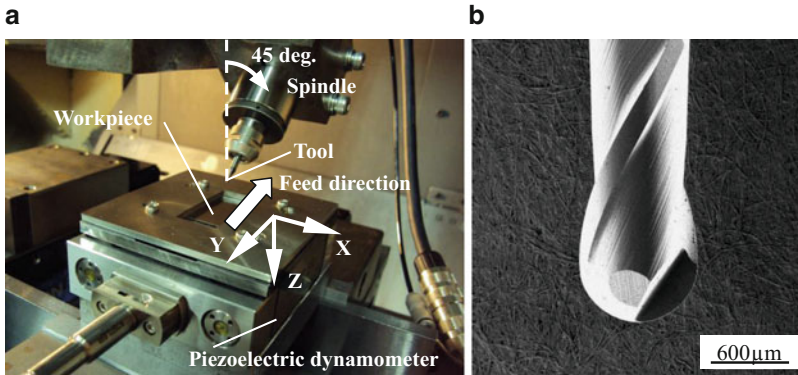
Micro milling experiment: (a) setup; (b) ball end mill
